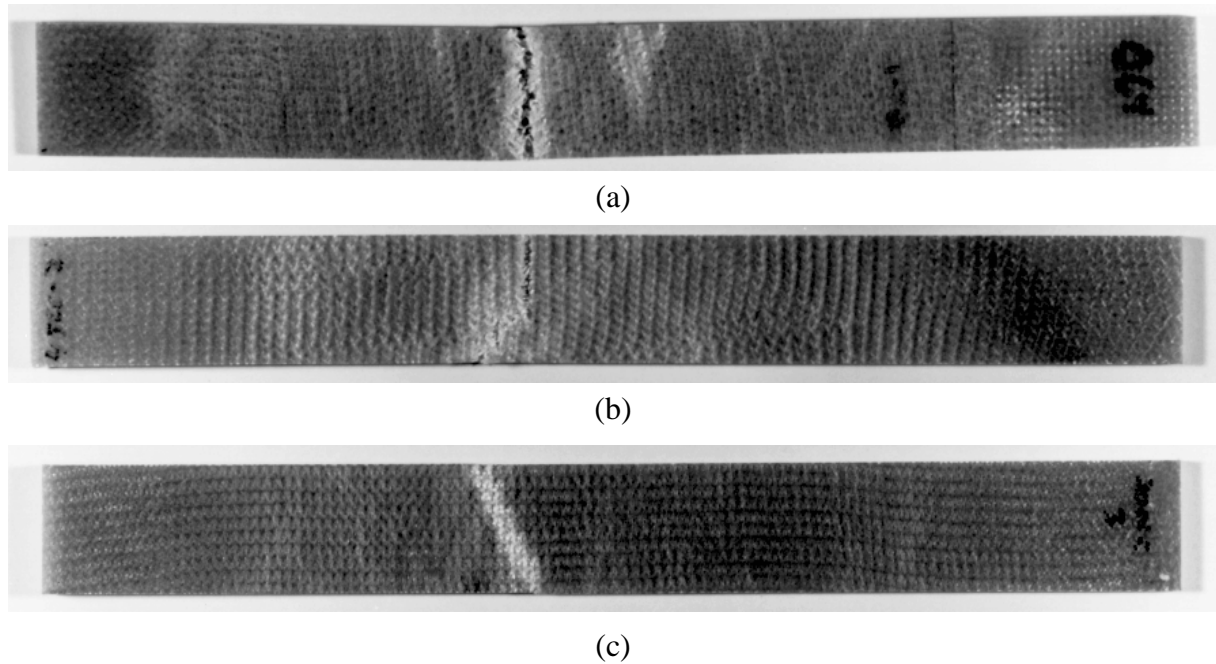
Typical fractured specimens made from (a) undeformed, and (b & c) deformed, fabrics.
